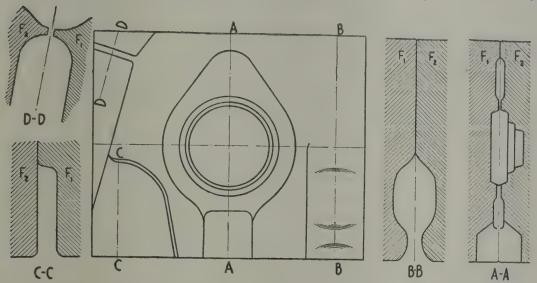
Typical example of multi-impression die with edging, flattening and cut-off impressions:  $F_1$ —The Lower Die;  $F_2$ —The Top Die
